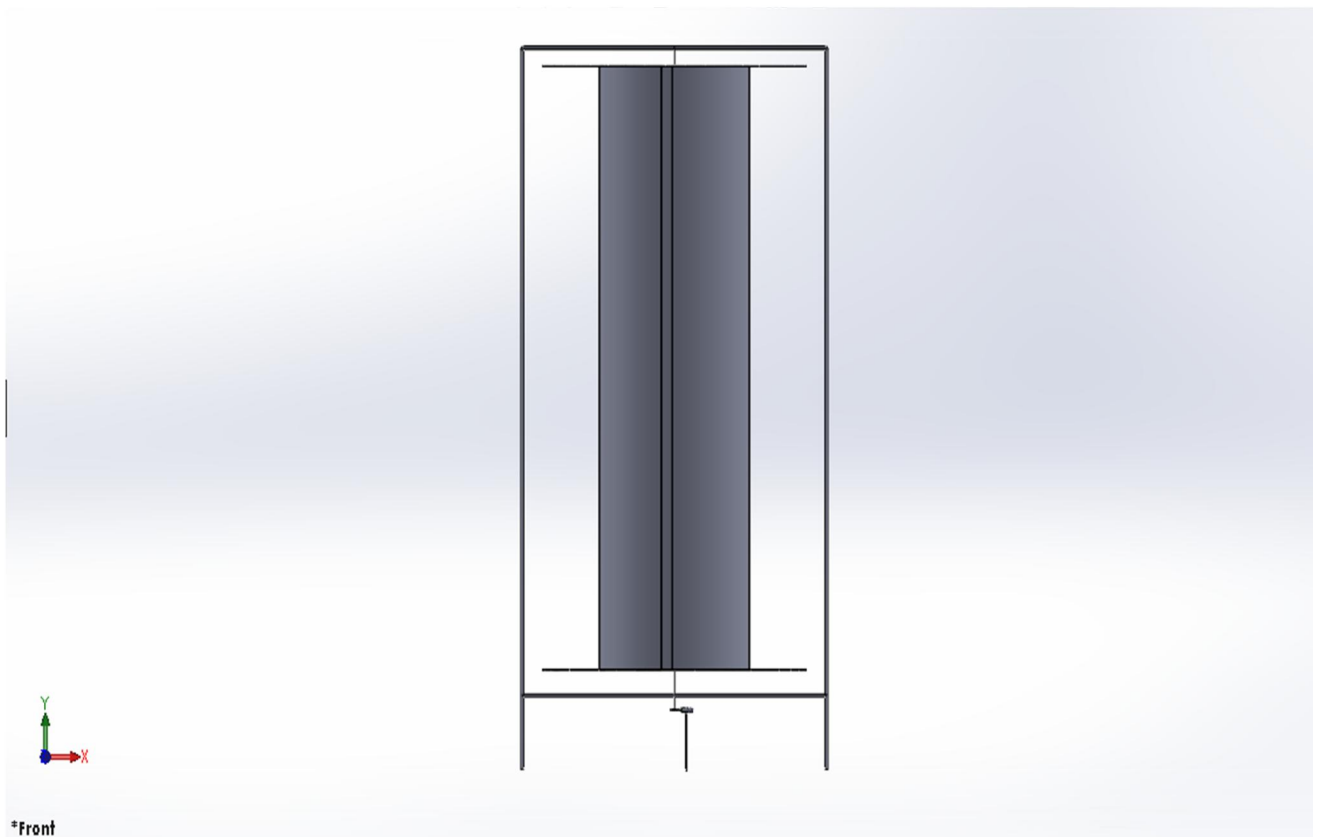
3D CAD assembly modeling of wind turbine water pump
